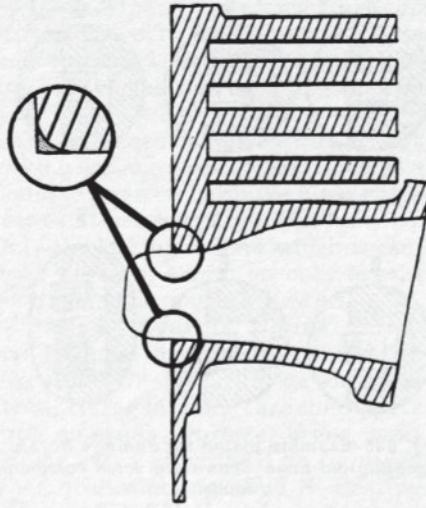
Some manufacturers recommend that edges of ports be chamfered as shown in insert, after re boring.
